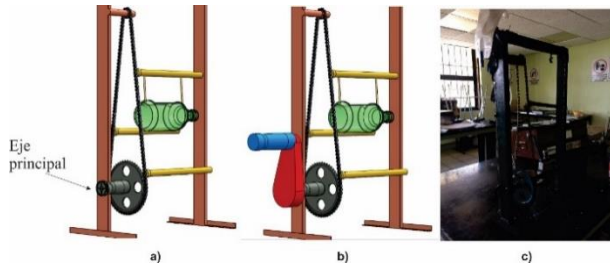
Prototype 1. a) In CAD indicating the main axis to generate the movement. b) In CAD with manual drive. c) Constructed
